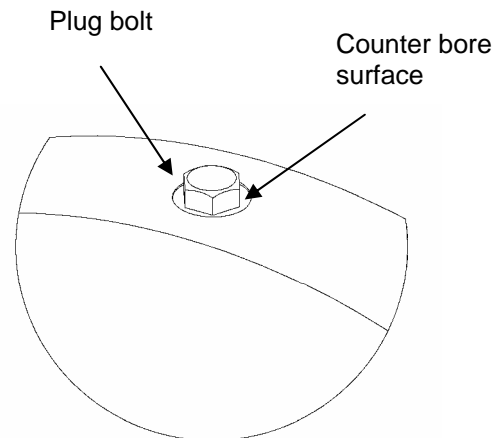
Meter End Flange with Tapped Hole with counter bore for Hoist Ring
